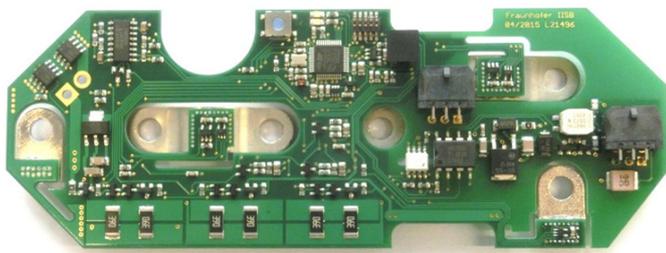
Battery monitoring electronics showing the busbars directly soldered on the printed circuit board.
